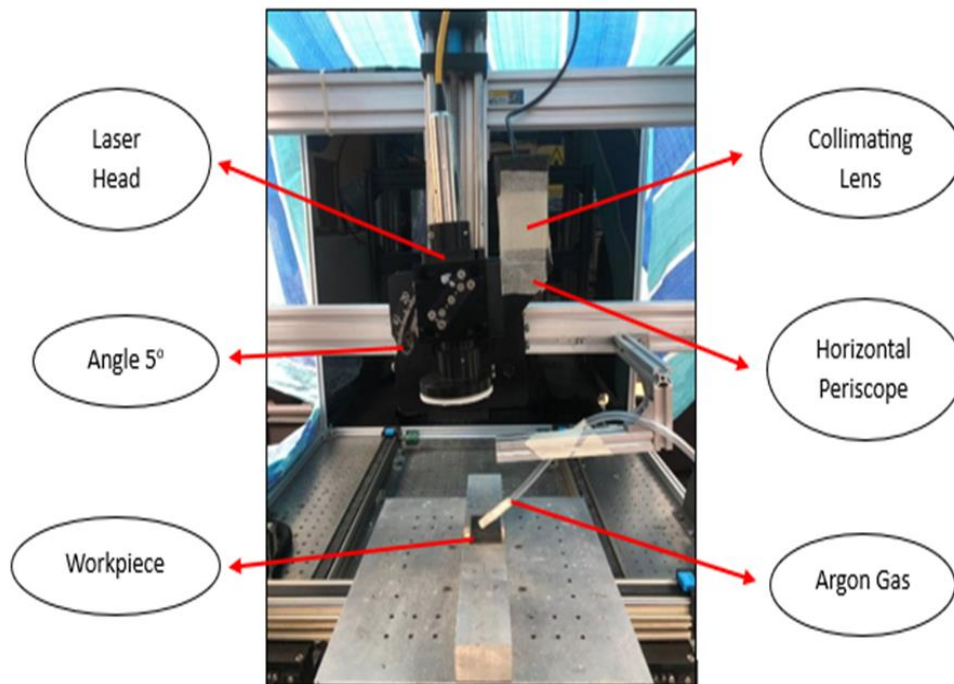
Experimental setup of pulse laser welding (a).
